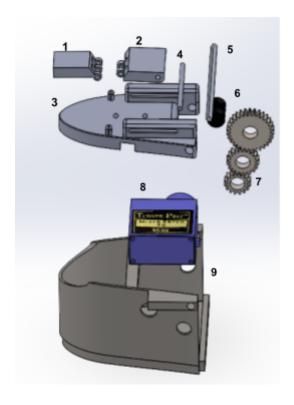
Exploded View of Components The figure above shows the actuation device's design components in SolidWorks
